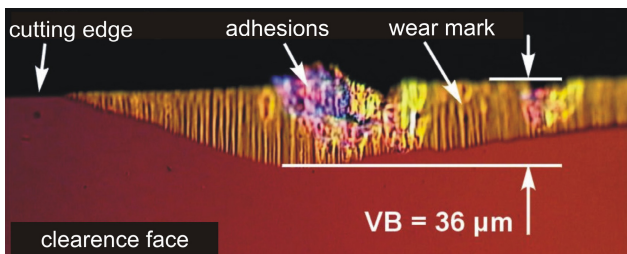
Microscopic image of the clearance face of a diamond tool after face turning of untreated carbon steel (0.45% C); cutting distance 500 m
